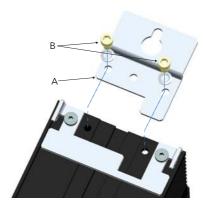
Bulkhead mounting 80A/100A unit shown (125A similar)
